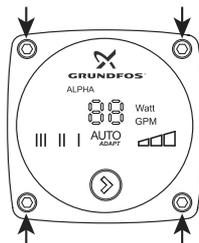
Remove the four socket head cap screws on the power head to change the power head position
